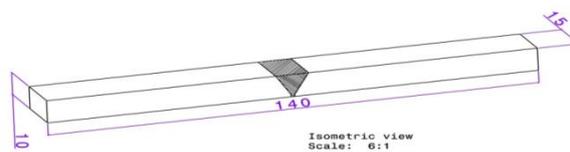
Schematic diagram of sample dimensions and weld region.
